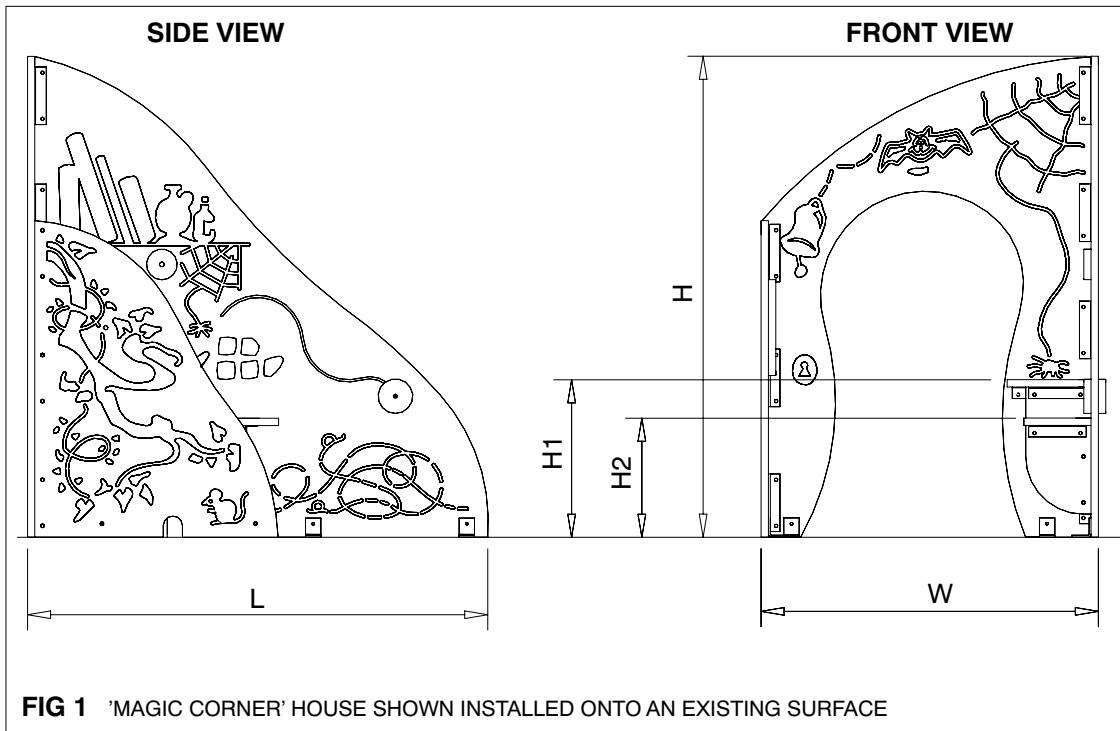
'MAGIC CORNER' HOUSE SHOWN INSTALLED ONTO AN EXISTING SURFACE
